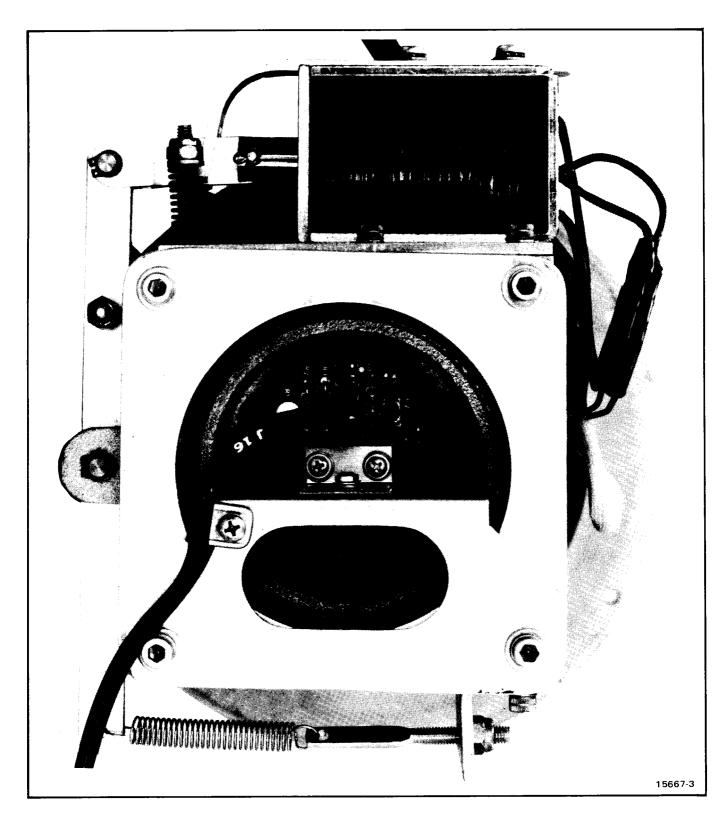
Reel Speed Sensor/Bracket Assembly Mounted in Motor Housing
